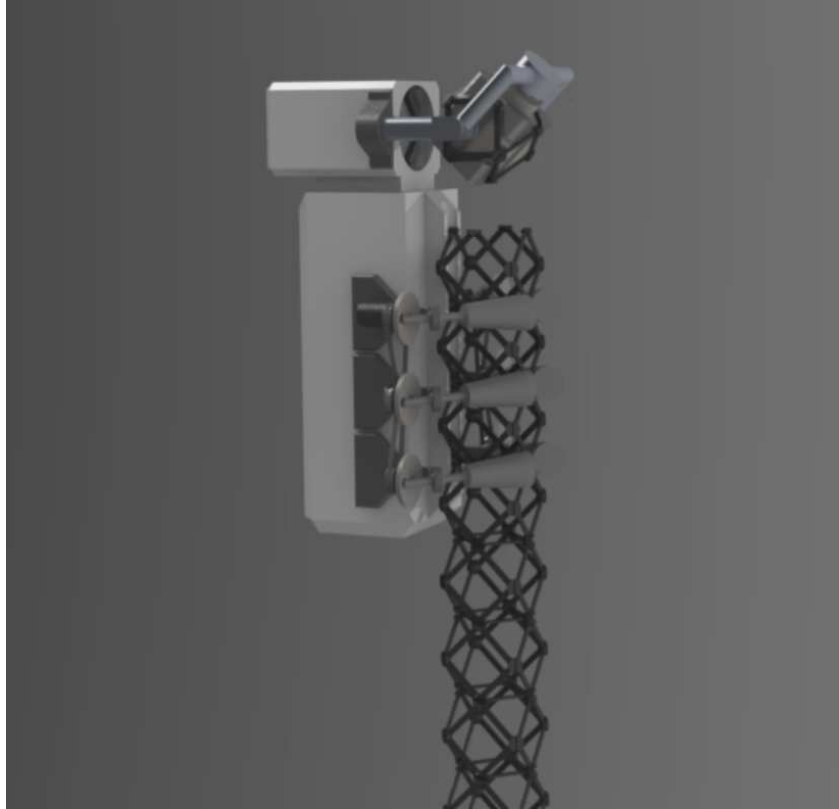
A mandrel based assembler. A mandrel provides a fixture for elements to be placed onto before placement on the lattice assembly. Locomotion is then performed relative to the structure. Code-name: Koala (cubes are 100mm edge to edge)
